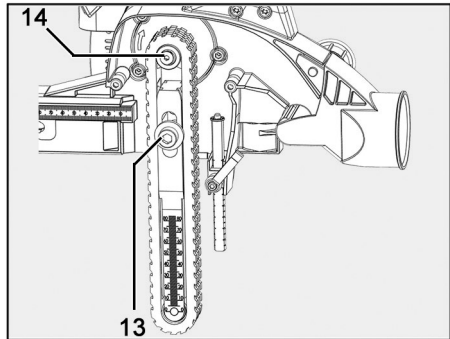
Installing and removing sprocket wheel, cutting chain and guide rail
